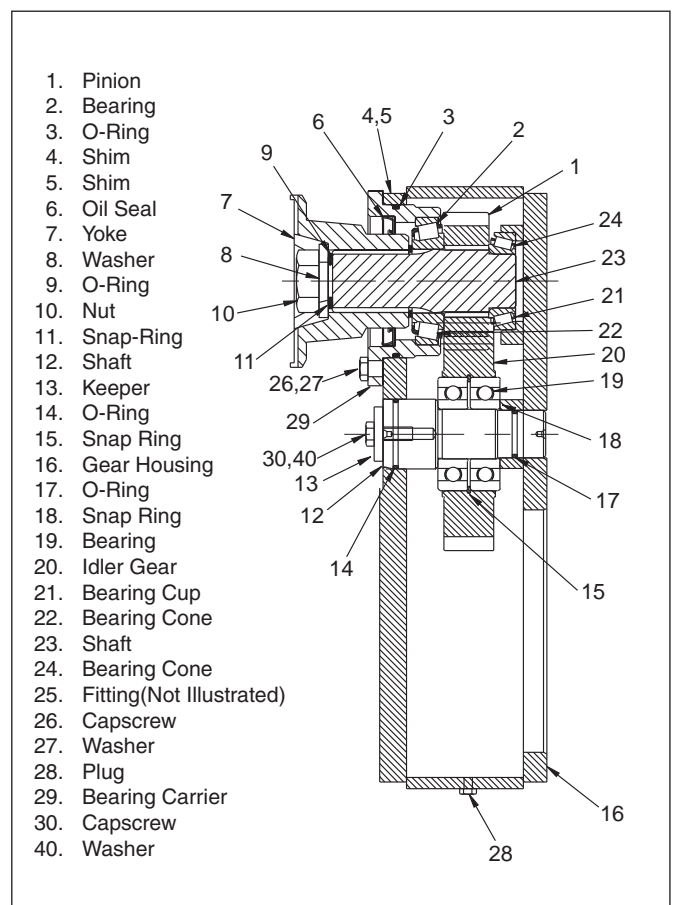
Gearbox on W8L for Komatsu D85ESS-2
